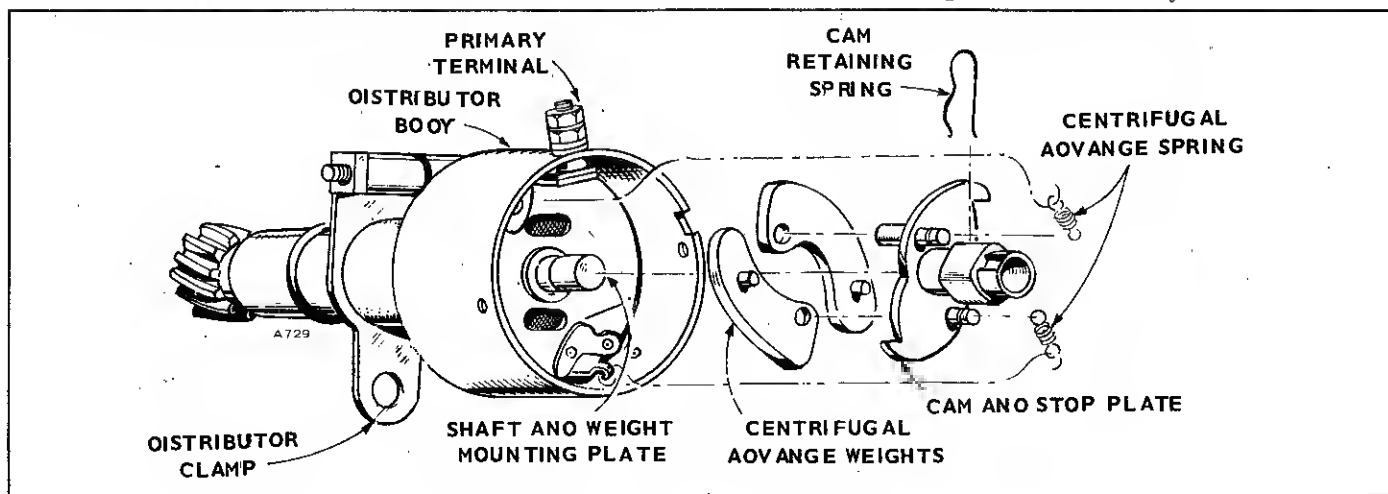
JC DISTRIBUTOR DISASSEMBLY
